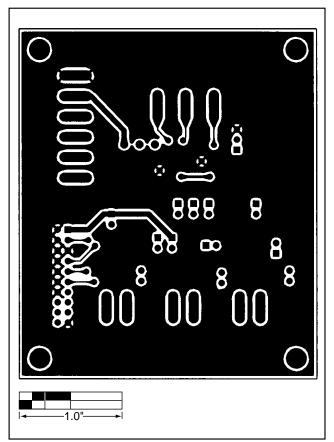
MAX1662 EV Kit PC Board Layout—Solder Side
